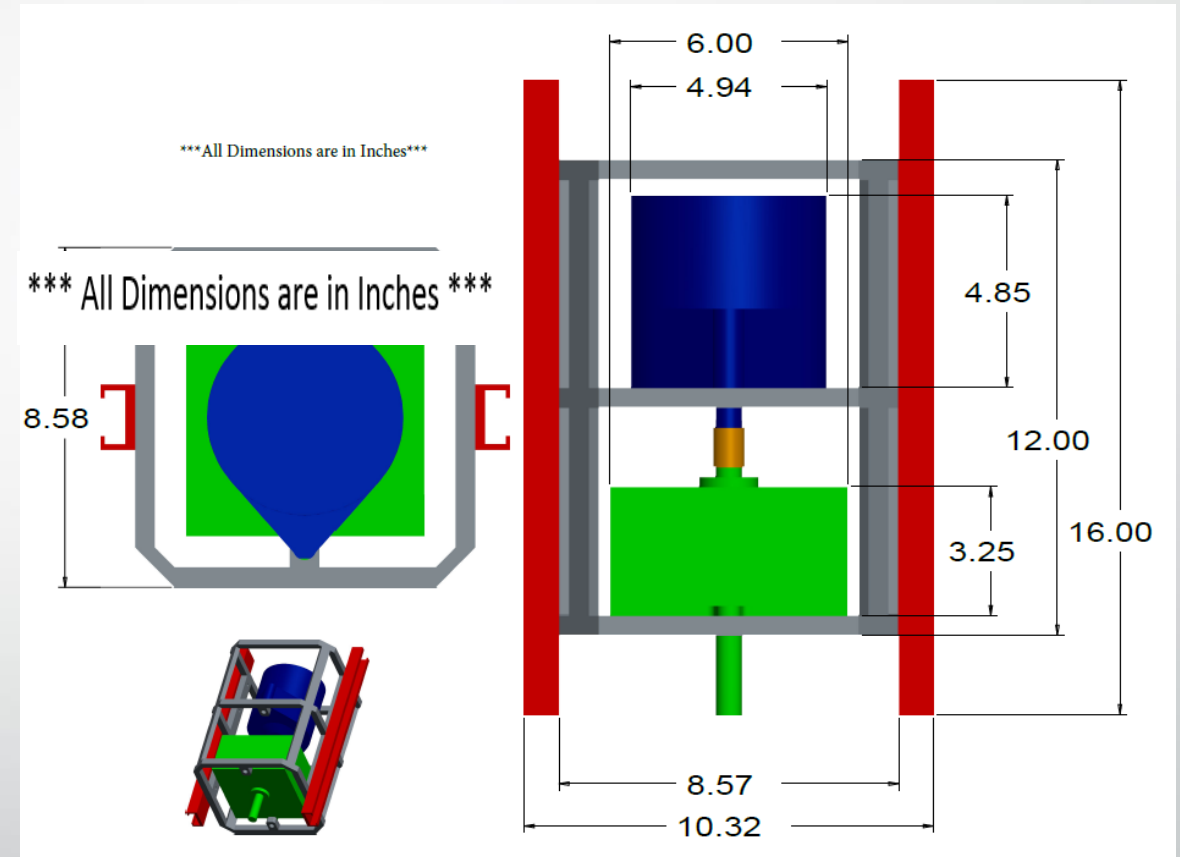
Hydroelectric Generator Cross-Sectional View with Dimensions
